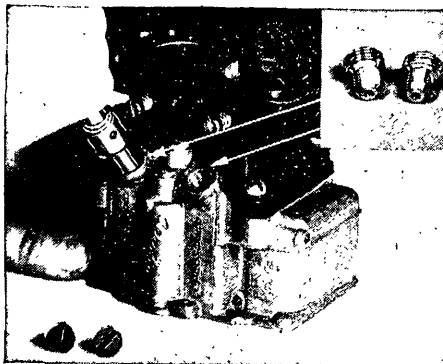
Remove main discharge jet plugs and metering jets. Scrap metering jets
